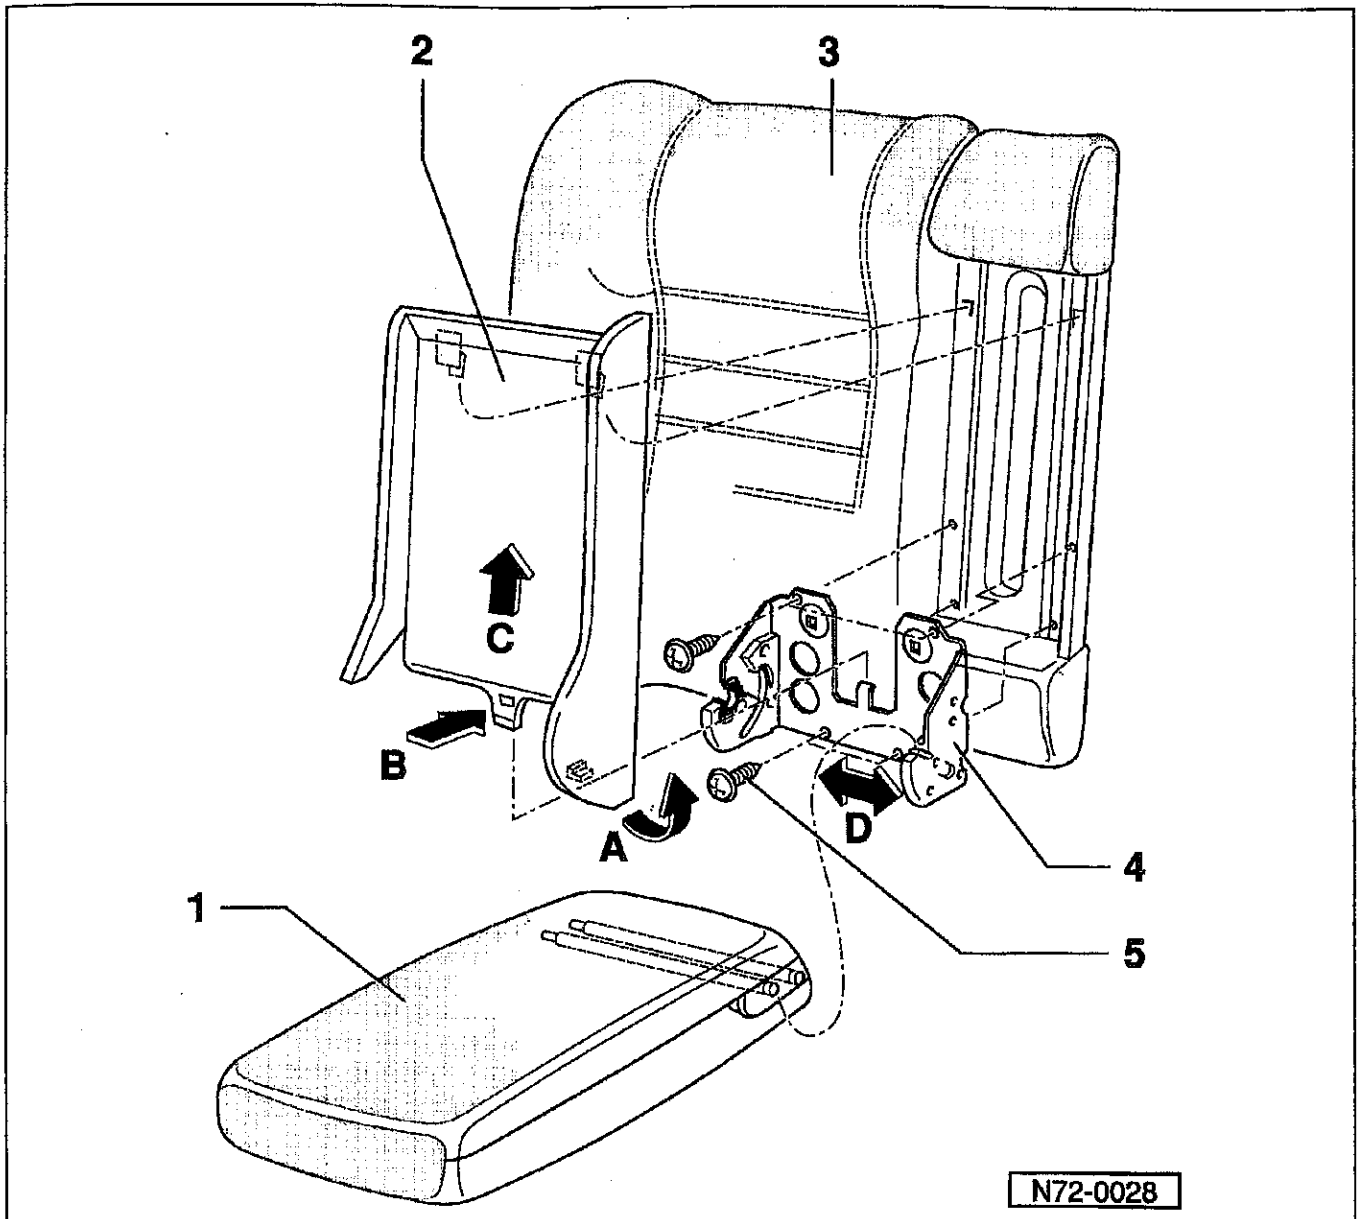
Exploded view of center arm rest (rear seat) for Jetta models.
